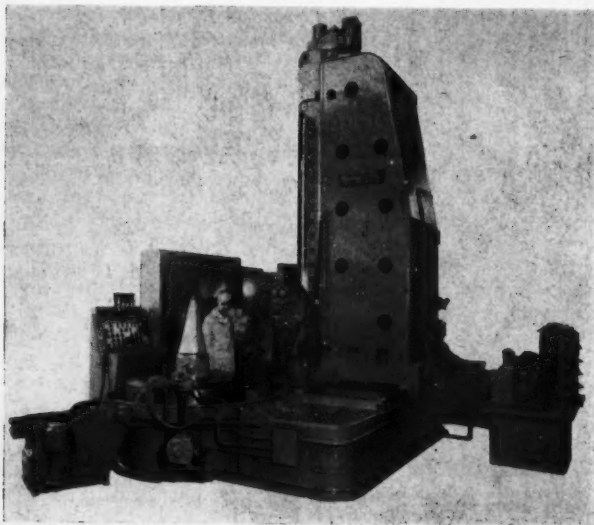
Barnes drill numerically-controlled drilling and tapping machine for operations on cylindrical and conical parts
